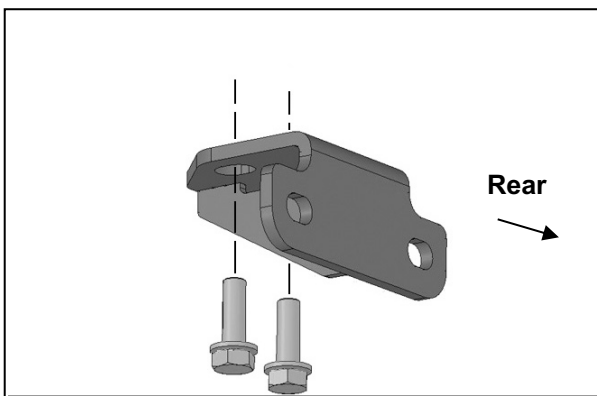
Attach Front Frame Bracket to driver/left front mounting location (see Fig 1)
